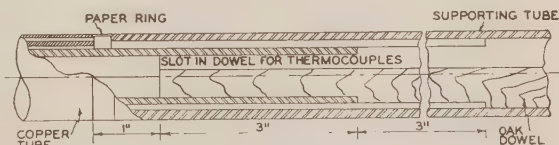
DETAILS OF SUPPORTING ASSEMBLY
